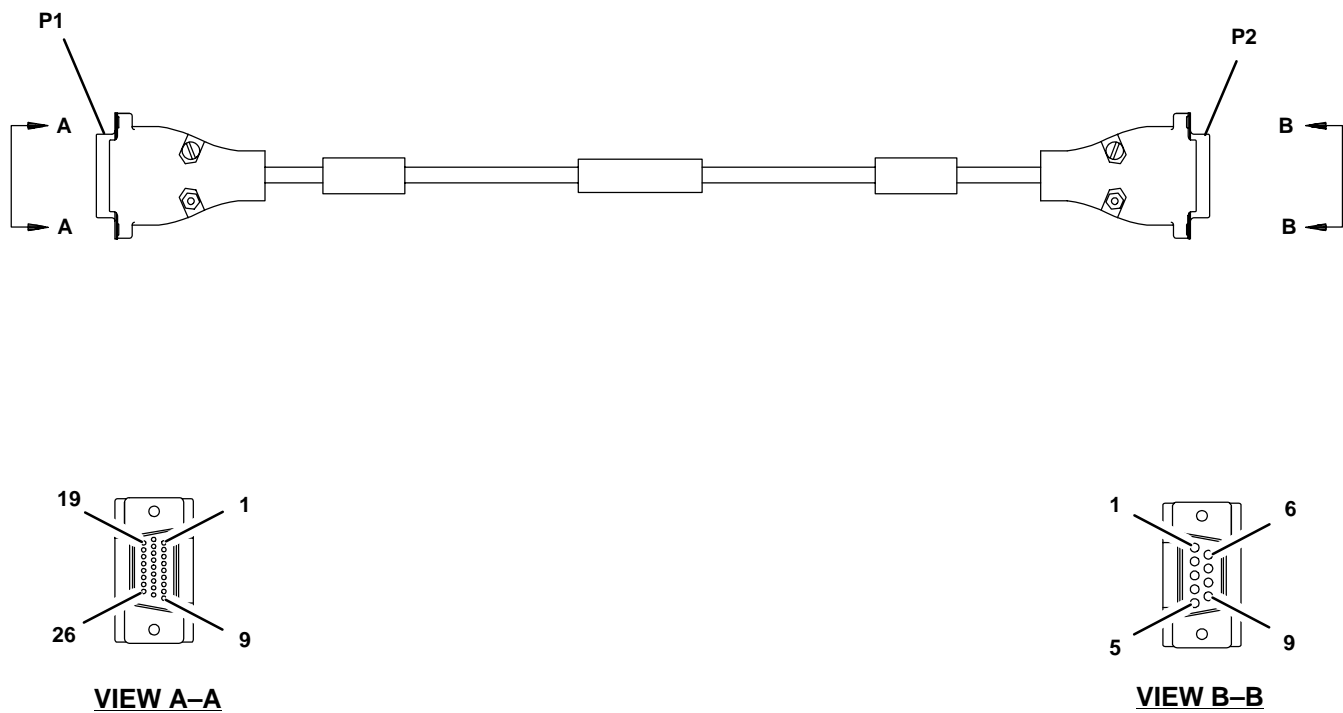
ASCII Remote and PS Control Cable Assembly, Y (10535-0730 Rev. B)
